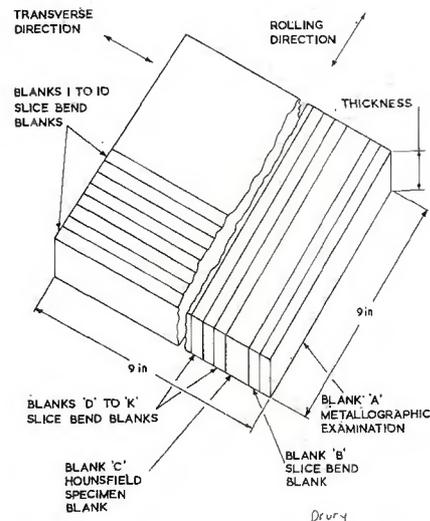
Layout of specimen blanks in 9 x 9 in. plate
